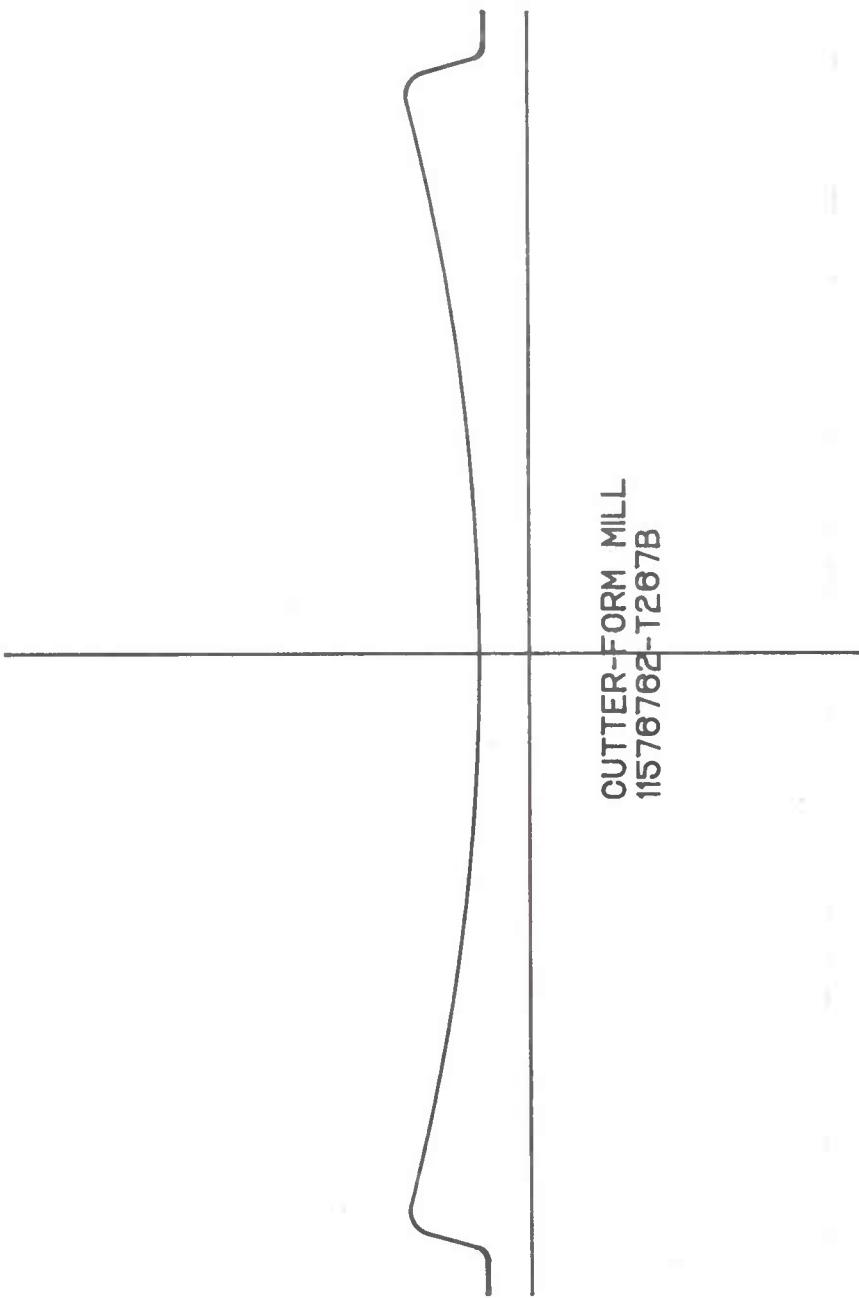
Cutter form tool comparator chart for the 152mm M81 gun tube.
